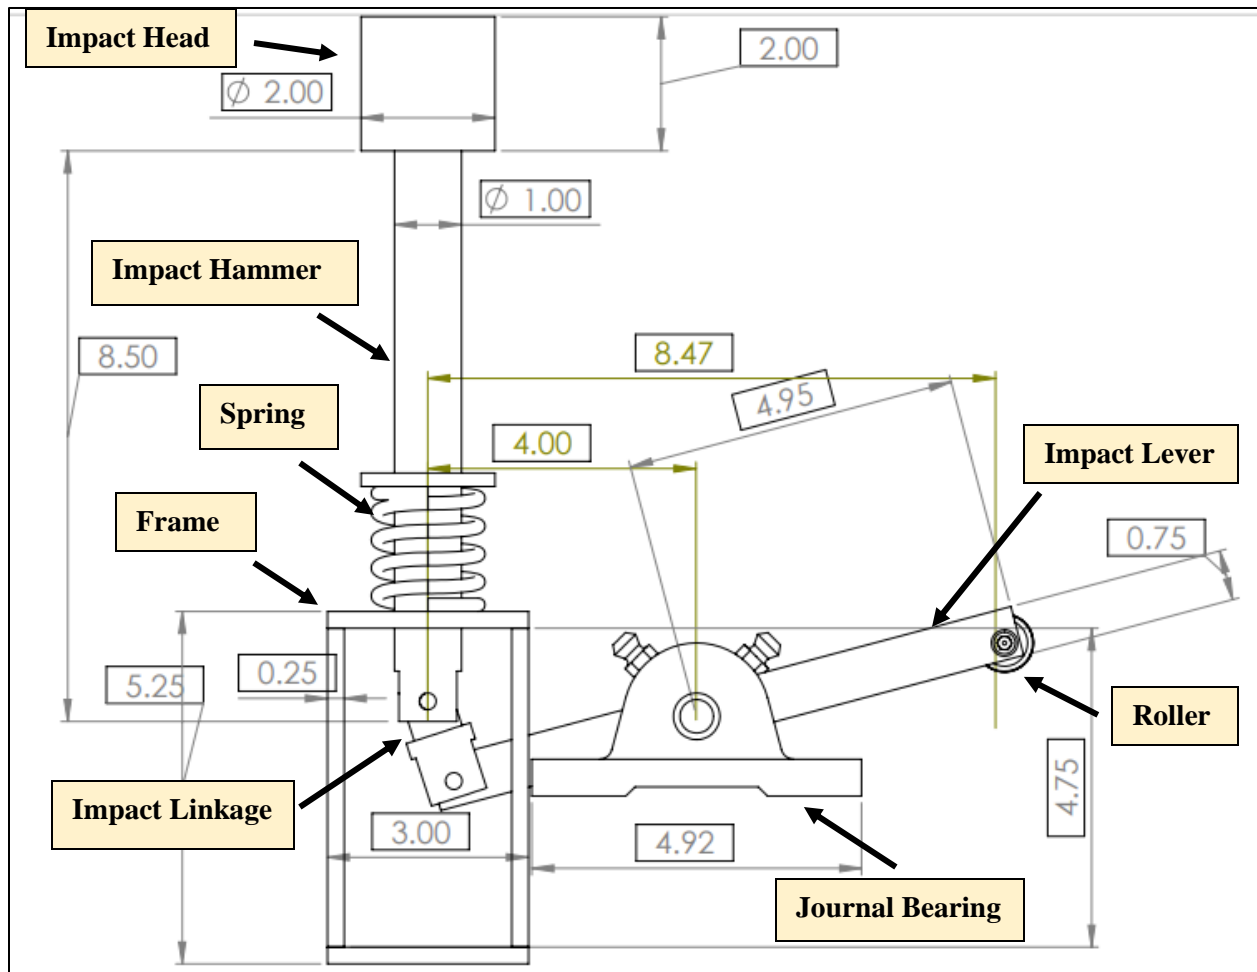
Impact mechanism CAD drawing (dimensions in inches)
